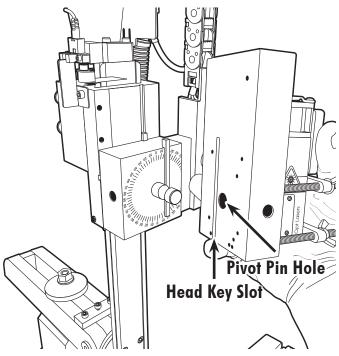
Align the head key slot and pivot pin hole on the back of the laser mount to the head key and the pivot pin on the column saddle.
